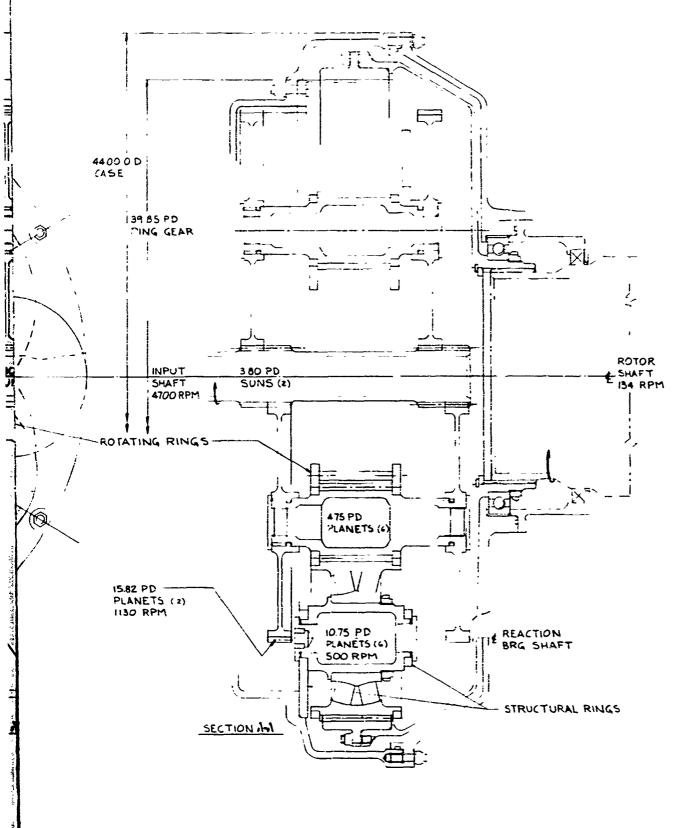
ROLLER GEAR REDUCER STUDY - SK 14233.
